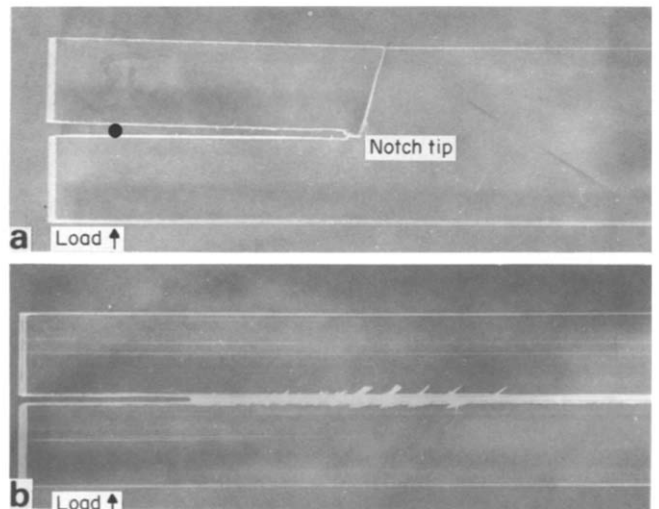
(a) ELS specimen after bending. (b) ELS specimen with side grooves after bending
